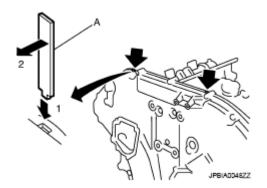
Inserting Tool Into Notch Of Front Timing Chain Case
